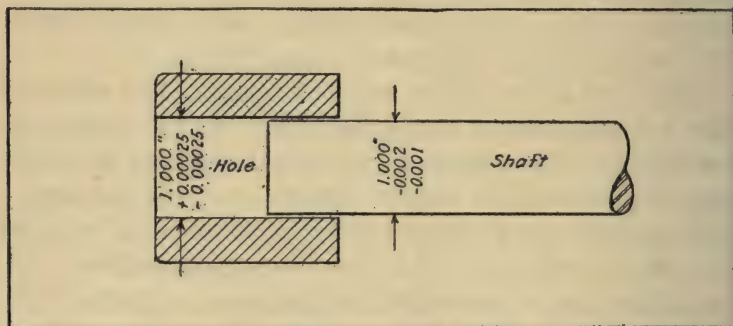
DIAGRAM SHOWING APPLICATION OF LIMITS TO A SHAFT AND HOLE
